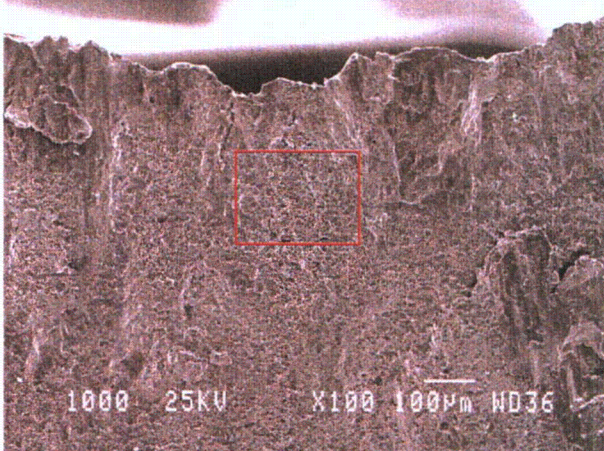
Appearance of fracture surface of TP A-1 (sample A)
